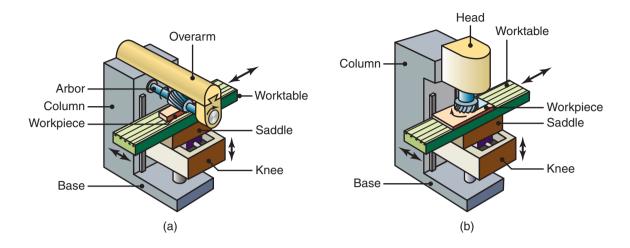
Schematic illustration of (a) a horizontal-spindle column-and-knee-type milling machine and (b) vertical-spindle column-and-knee-type milling machine. *Source:* After G. Boothroyd.
